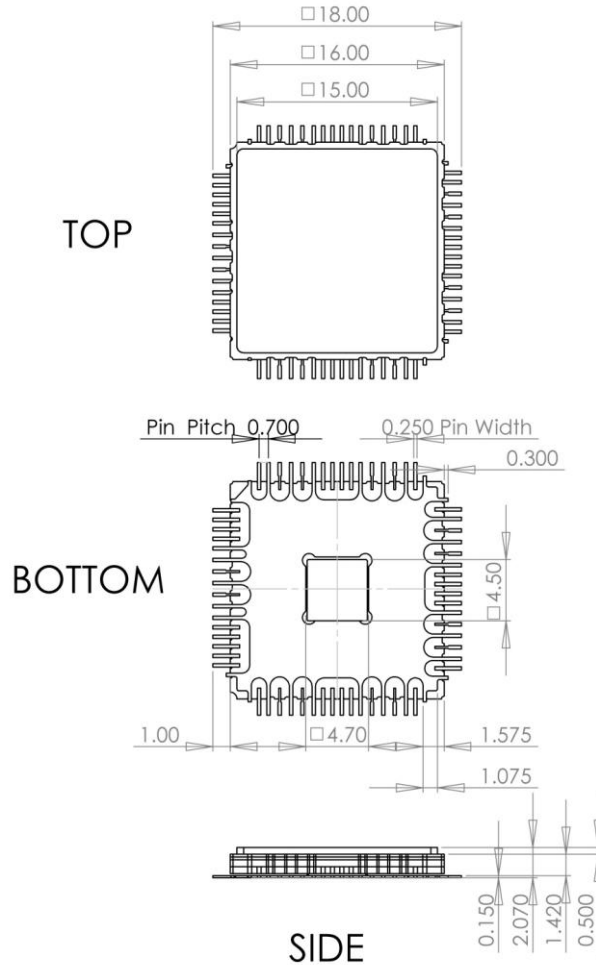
CQFP 64-Pin Package Drawing (All Dimensions in mm)
